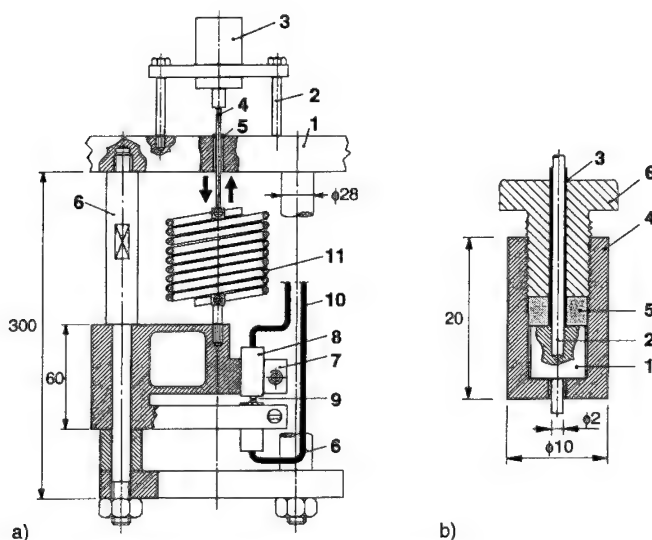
Scheme of the CER equipment for high temperatures and pressures {a}. (1) autoclave head, (2) supporting frame, (3) step motor, (4) pull rod, (5) seal, (6) supporting frame, (7) stiff spring, (8) specimen holder, (9) specimen, (10) connecting wires, (11) soft spring. Specimen holder with fixed specimen {b}. (1) specimen, (2) silver connecting wire, (3) insulation, (4) Zr holder, (5) Zr-ring, (6) Zr screw.
